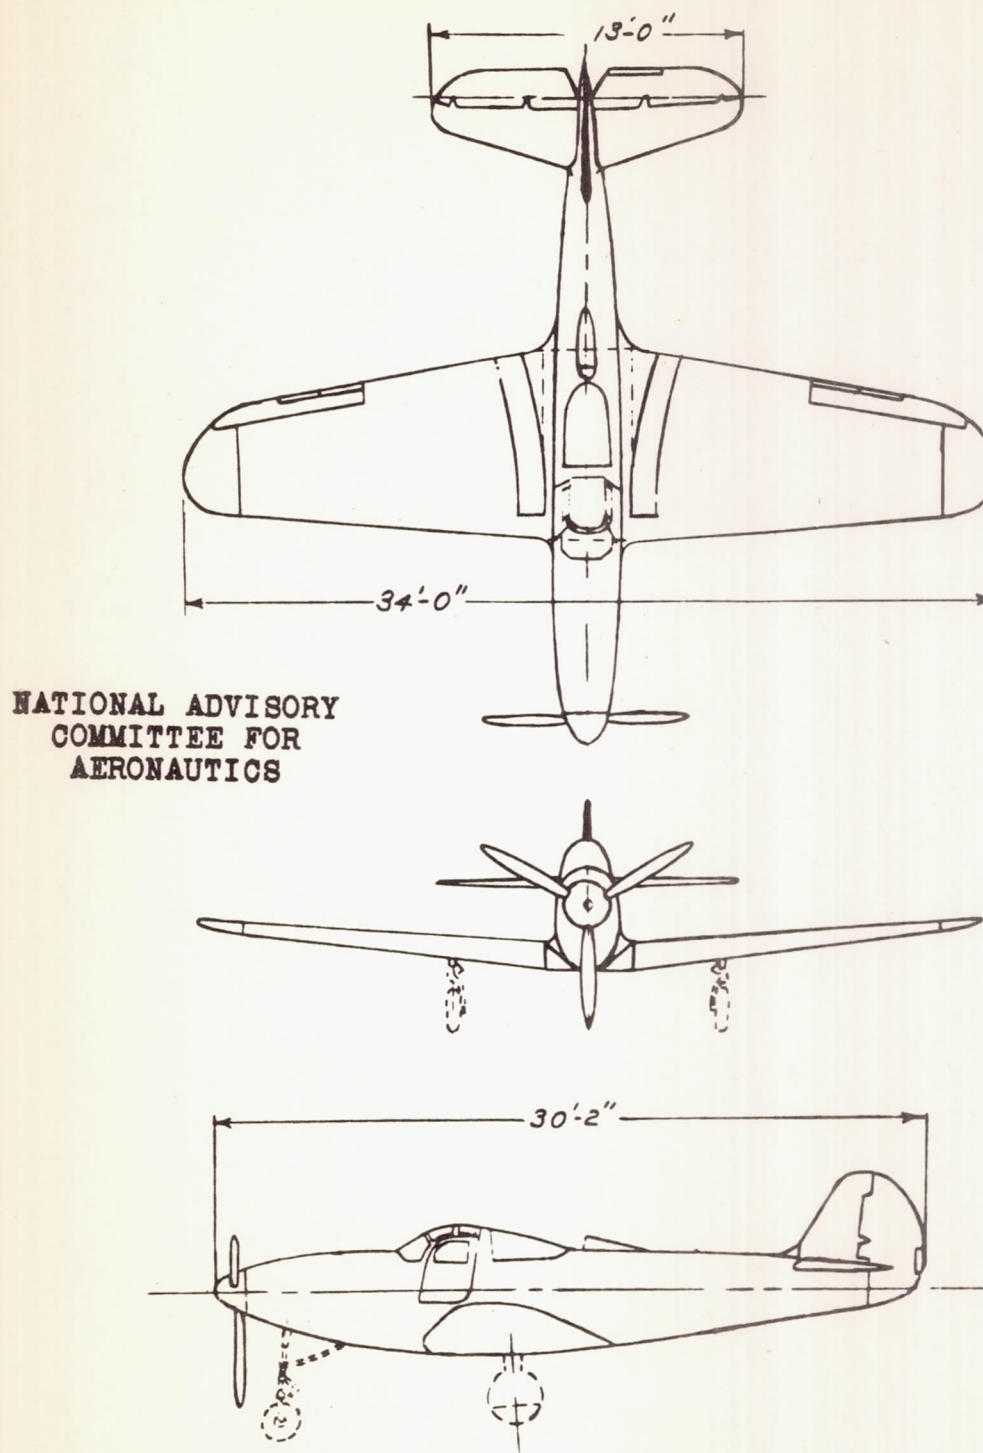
Three-view drawing of the Bell P-39N-1 airplane.
